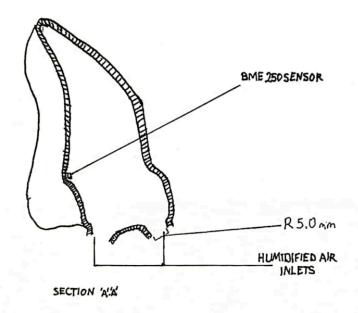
Alternate viewing of mask to show placement of BME250 sensor
